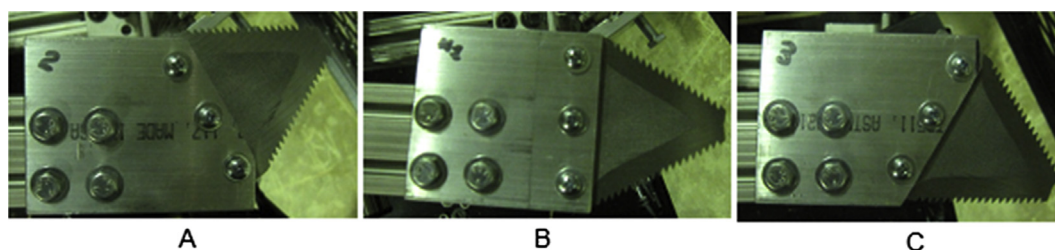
Serrated cutting blade mounted at (a) straight cut (0°), (b) 30° oblique cut, and (c) 60° oblique cut.
